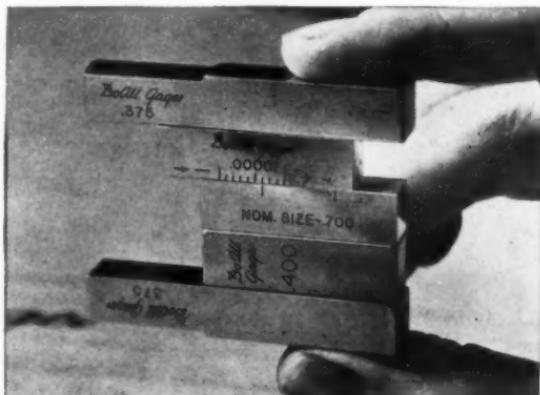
Caliper bars on the outside of a gage block stack for direct measurement of internal dimensions. (DoAll Co. photo).
